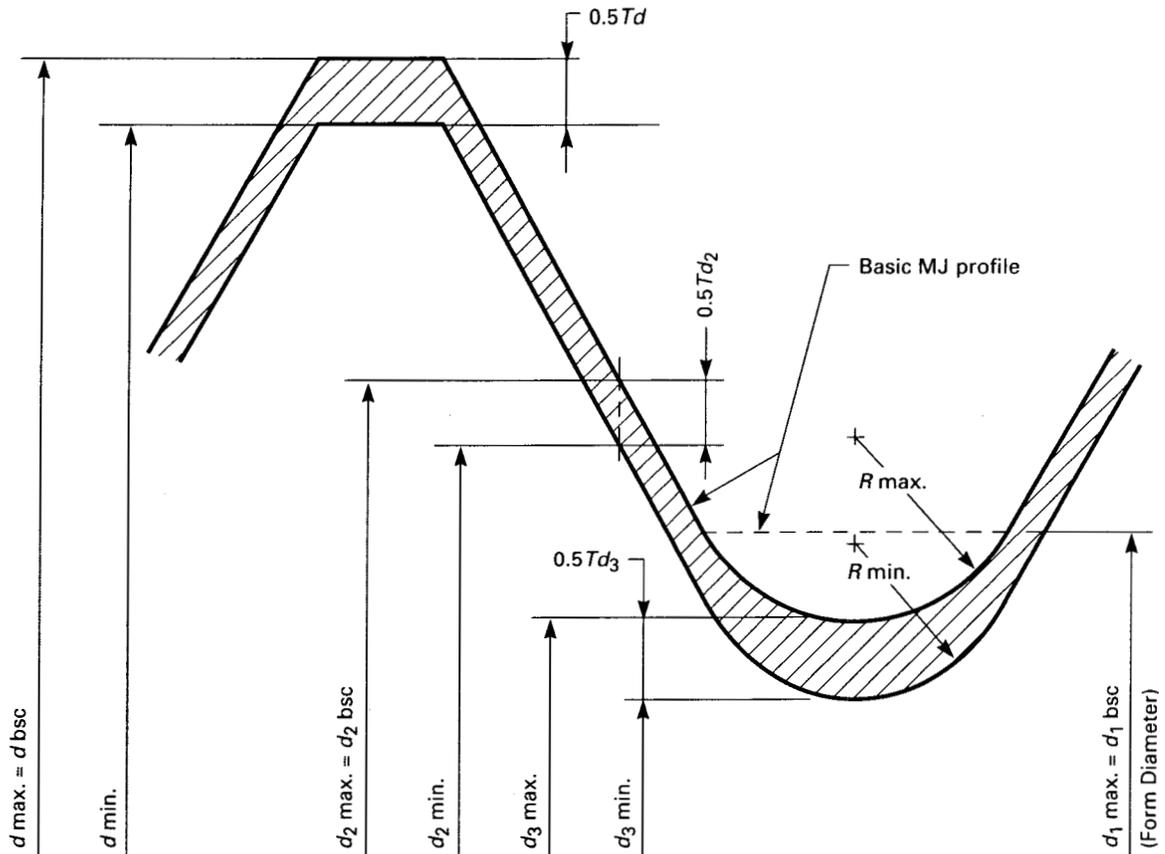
EXTERNAL THREAD TOLERANCES
